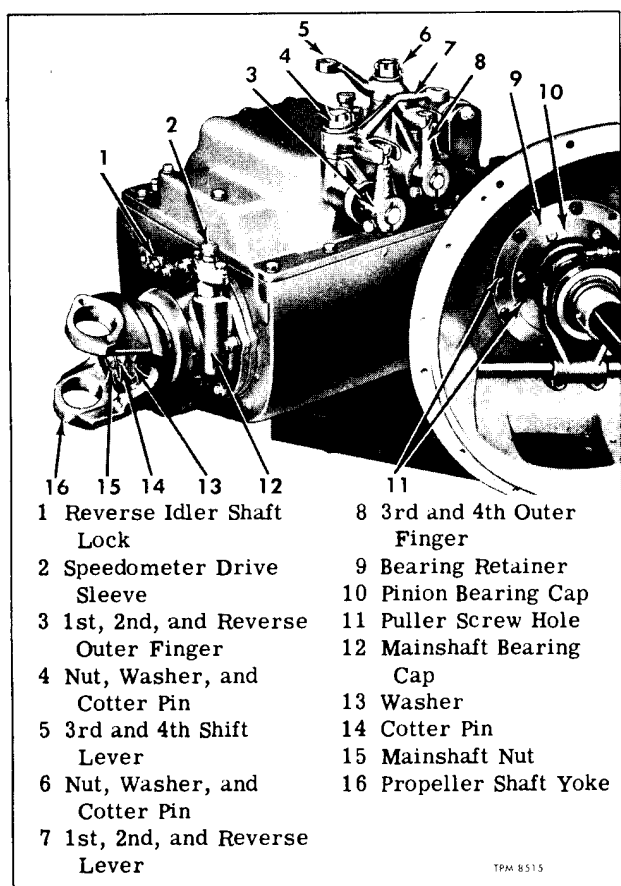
Transmission Showing Shift Levers and Propeller Shaft Yoke
